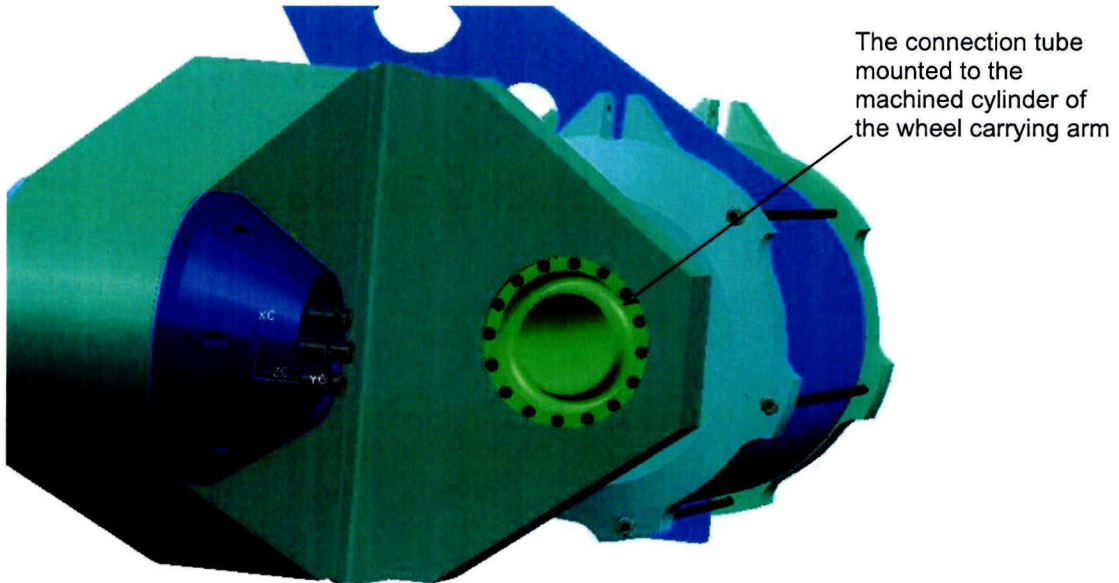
Subassembly of the steering system mounted from the bottom of the wheel carrying arm to the “machined cylinder”
